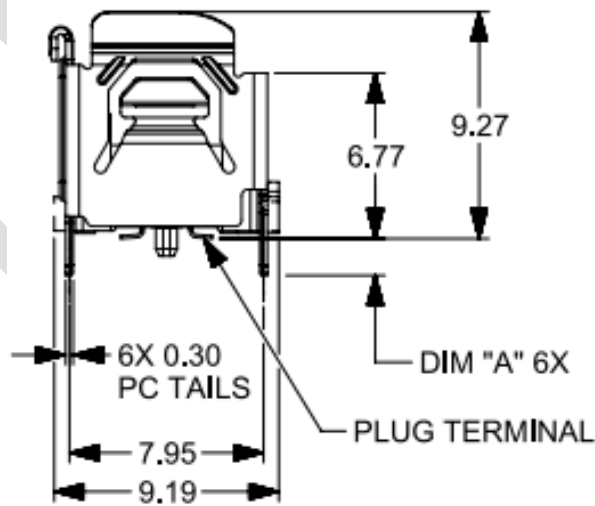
Dual-Bay Profile View of Fixed-Side Connector Cage
